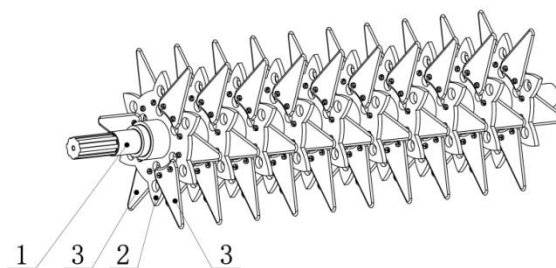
Structural diagram of crushing and thread rubbing rotor. 1: Rubbing and cutting shaft; 2: Rubbing and cutting cutter disc; and 3: Rubbing and cutting cutter
